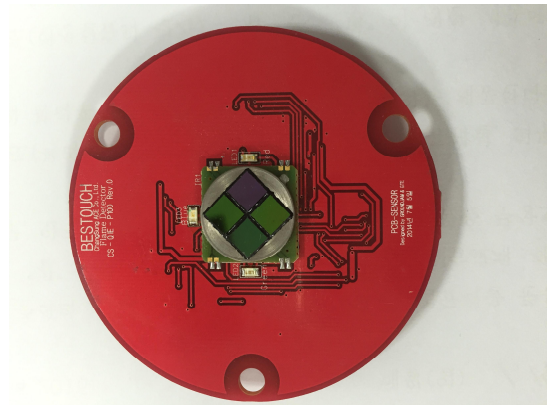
PCB of 4 channel IR3(Detecting P/T)
